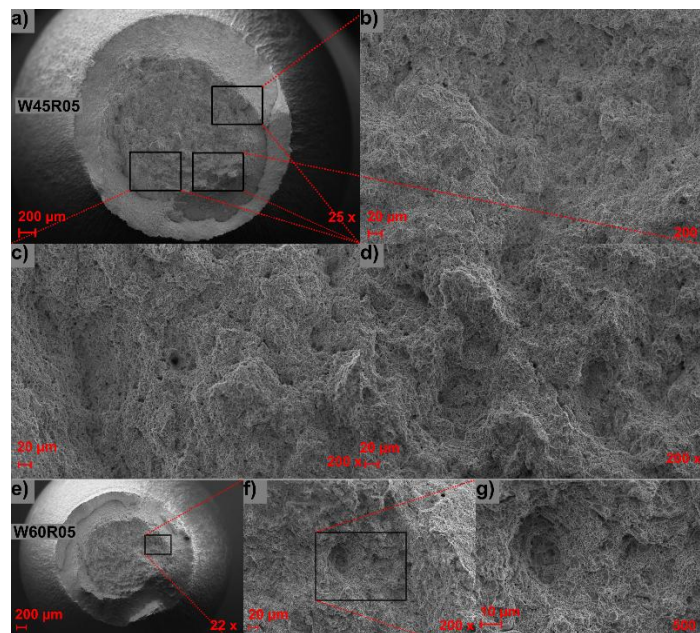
SEM analysis of the tensile fracture specimen W45R05 and W60R05
